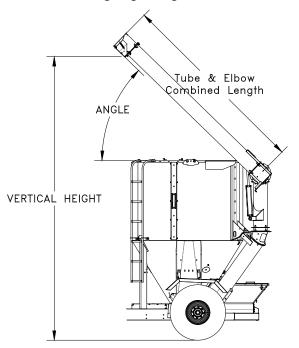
Unloading Auger Heights (Refer to Table 4 for Detailed Heights.)
